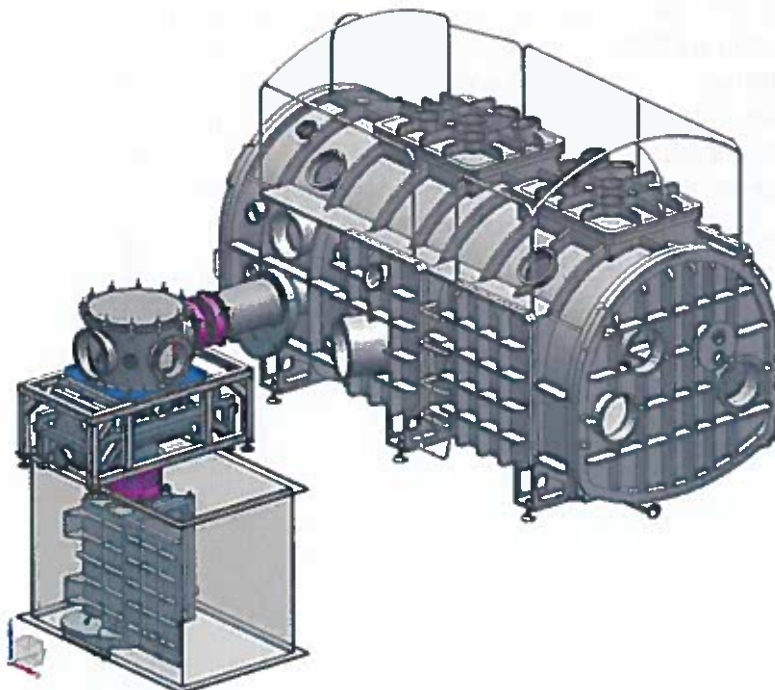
Overall view of the Compressor and Beam Injector assembly.
